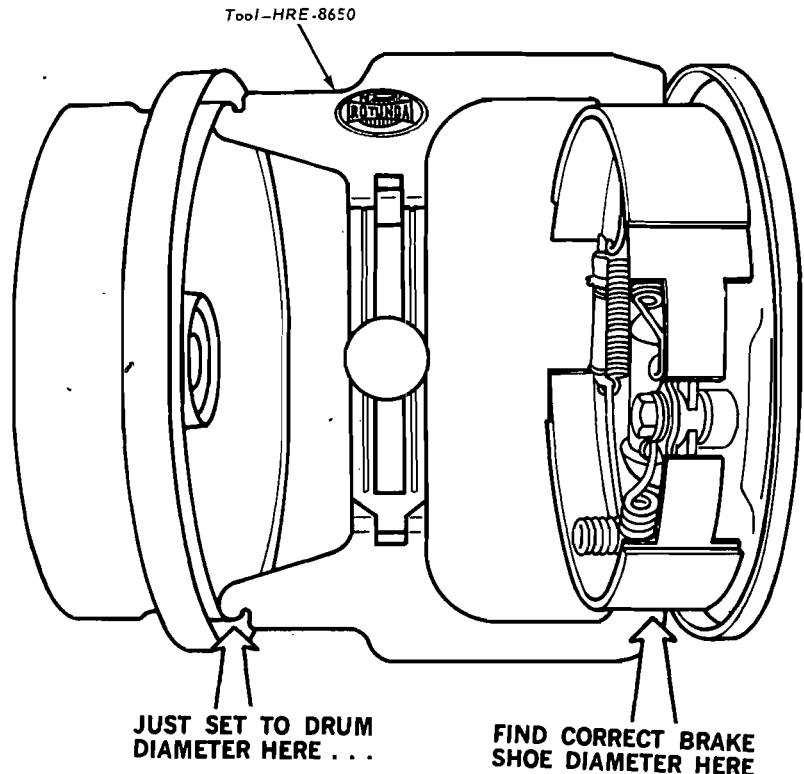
Adjusting Brake Shoes Using Tool HRE-8650
